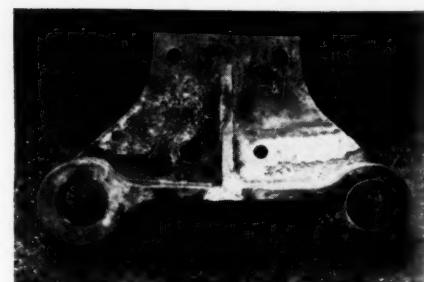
Cast-iron roll-crusher saddle after reclamation by welding.
